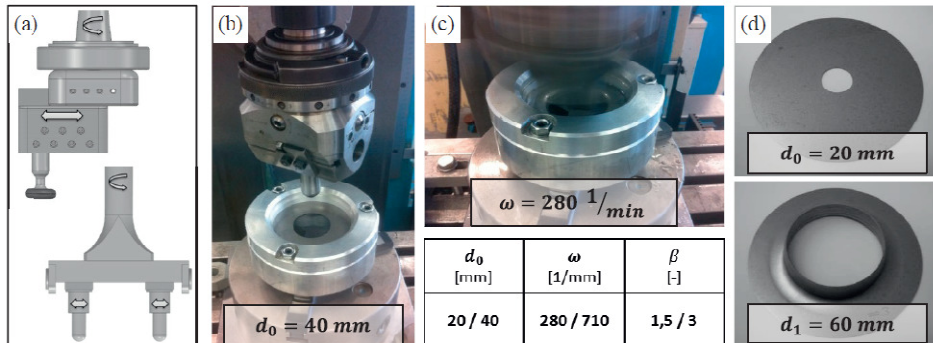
High-speed incremental hole flanging: tool designs a), setup b), parameters c) and specimens before and after performing. Bambach et al.2014
